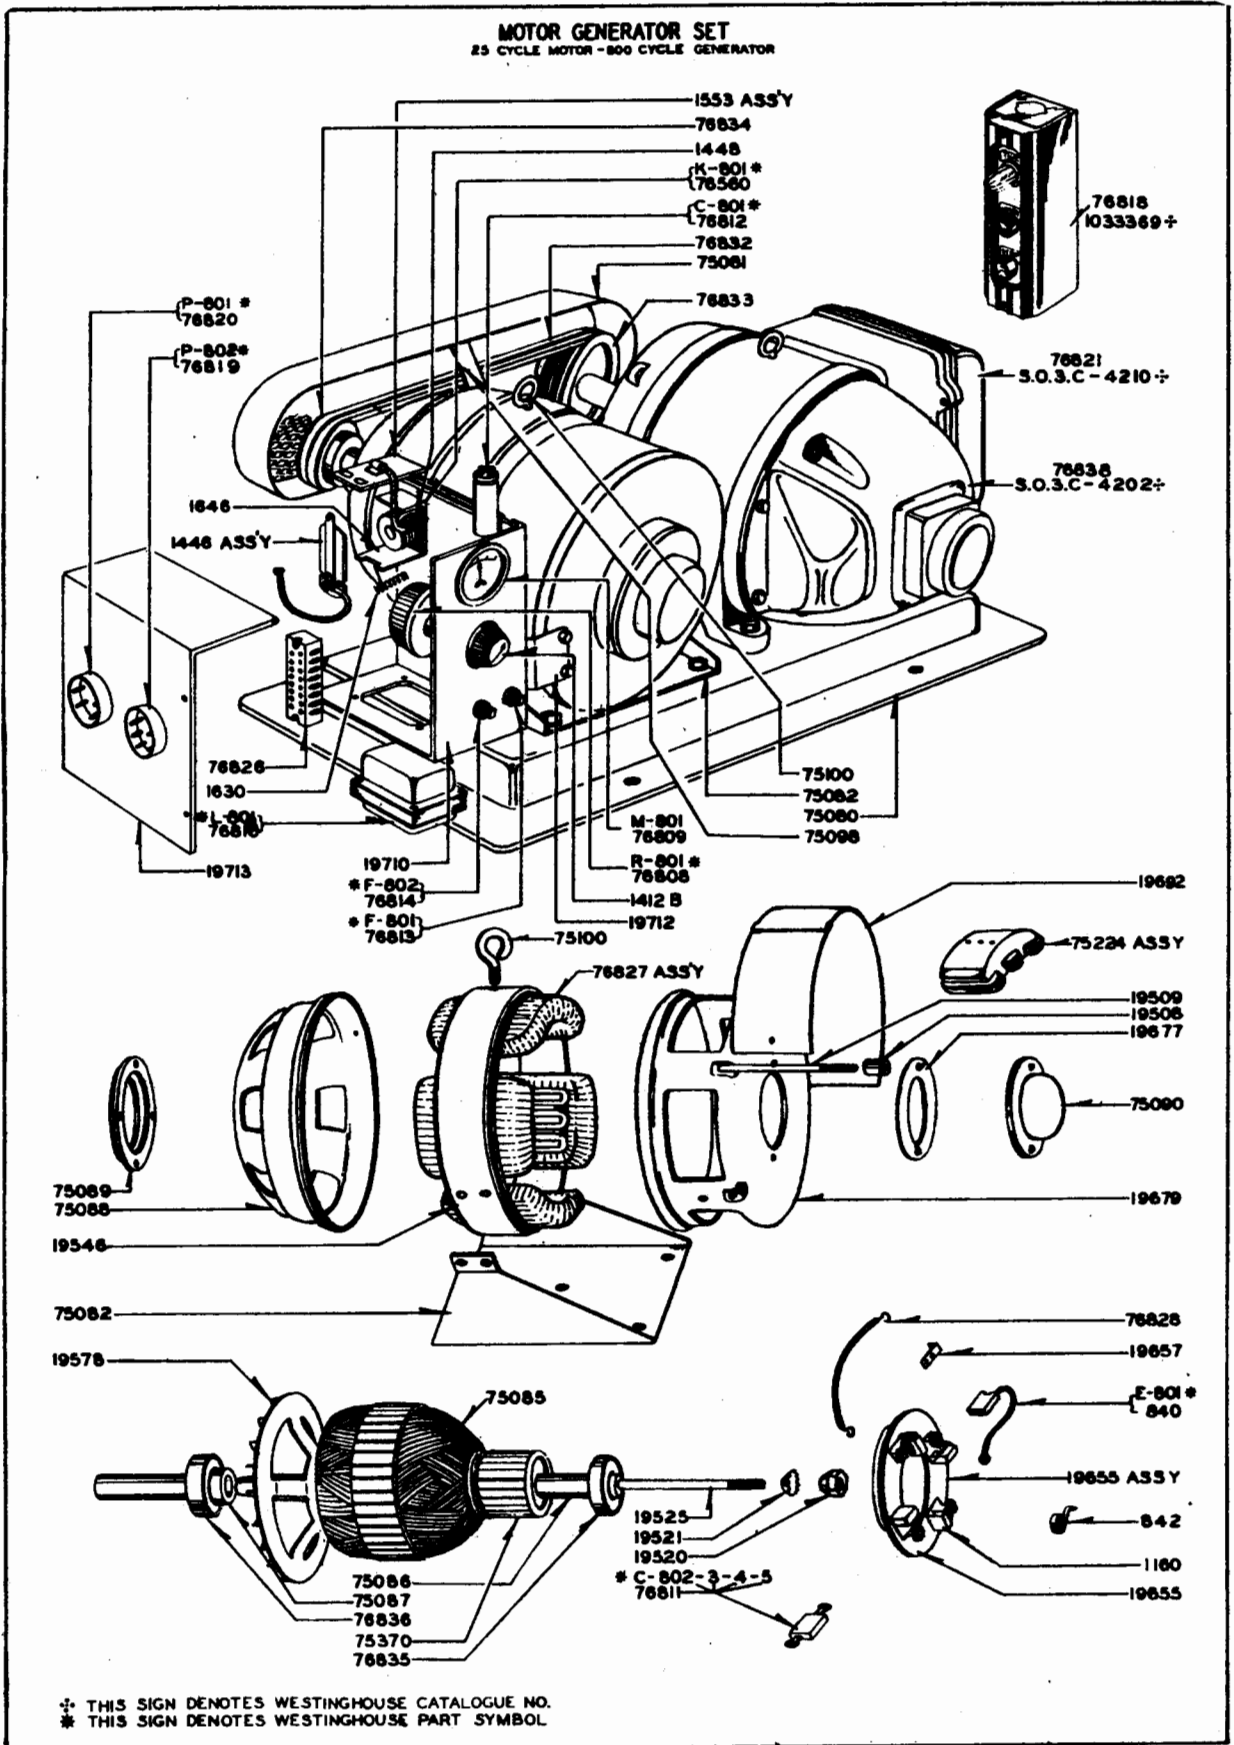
Motor Generator Parts for Motor Generator Set Type CDO-21652
